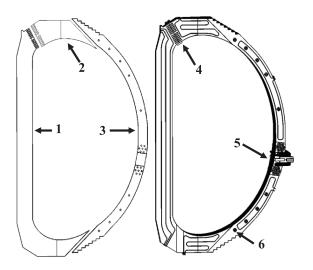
The cross-section view of a demountable TF coil, in which, "1" is the L-shaped center section, "2" is the bar-shaped section, "3" is the C-shape section, is the bar-shaped section, "4" is demountable joint structure, "5" is the interconnection between the TF coils, "6" is the clamp bolts with insulated casing, there are 9 clamp bolts for a C-shape section. The weight is a TF coil is 9 tons.
